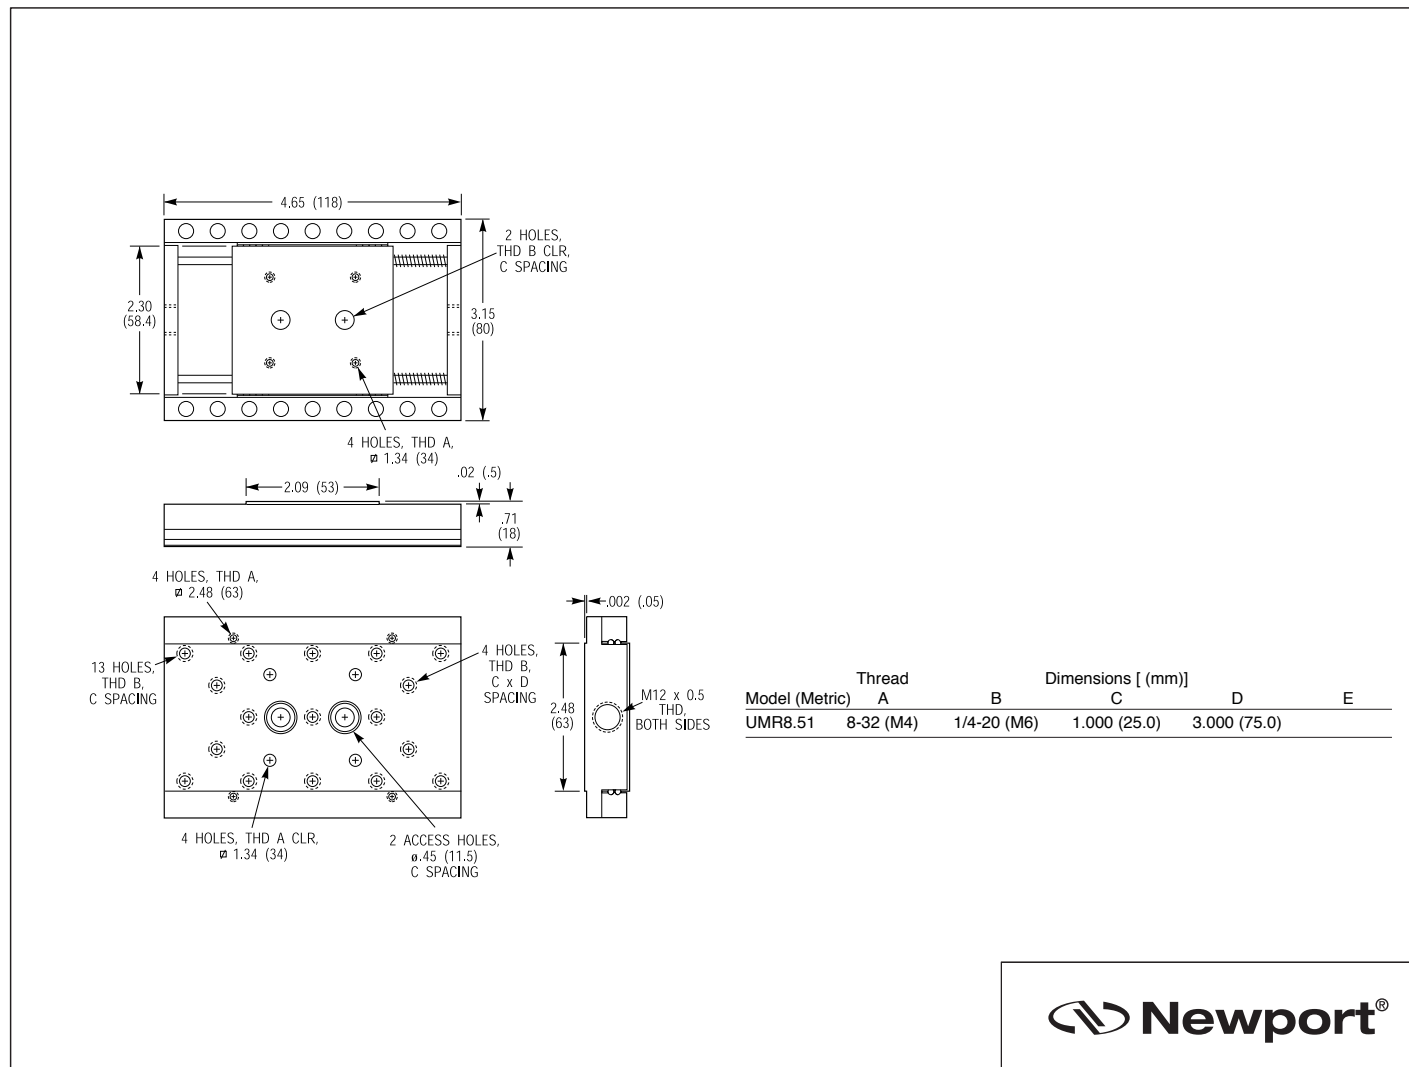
Manual linear stage, manufacturer part number MUMR8.51. Drawing courtesy of Newport Corporation [22].
